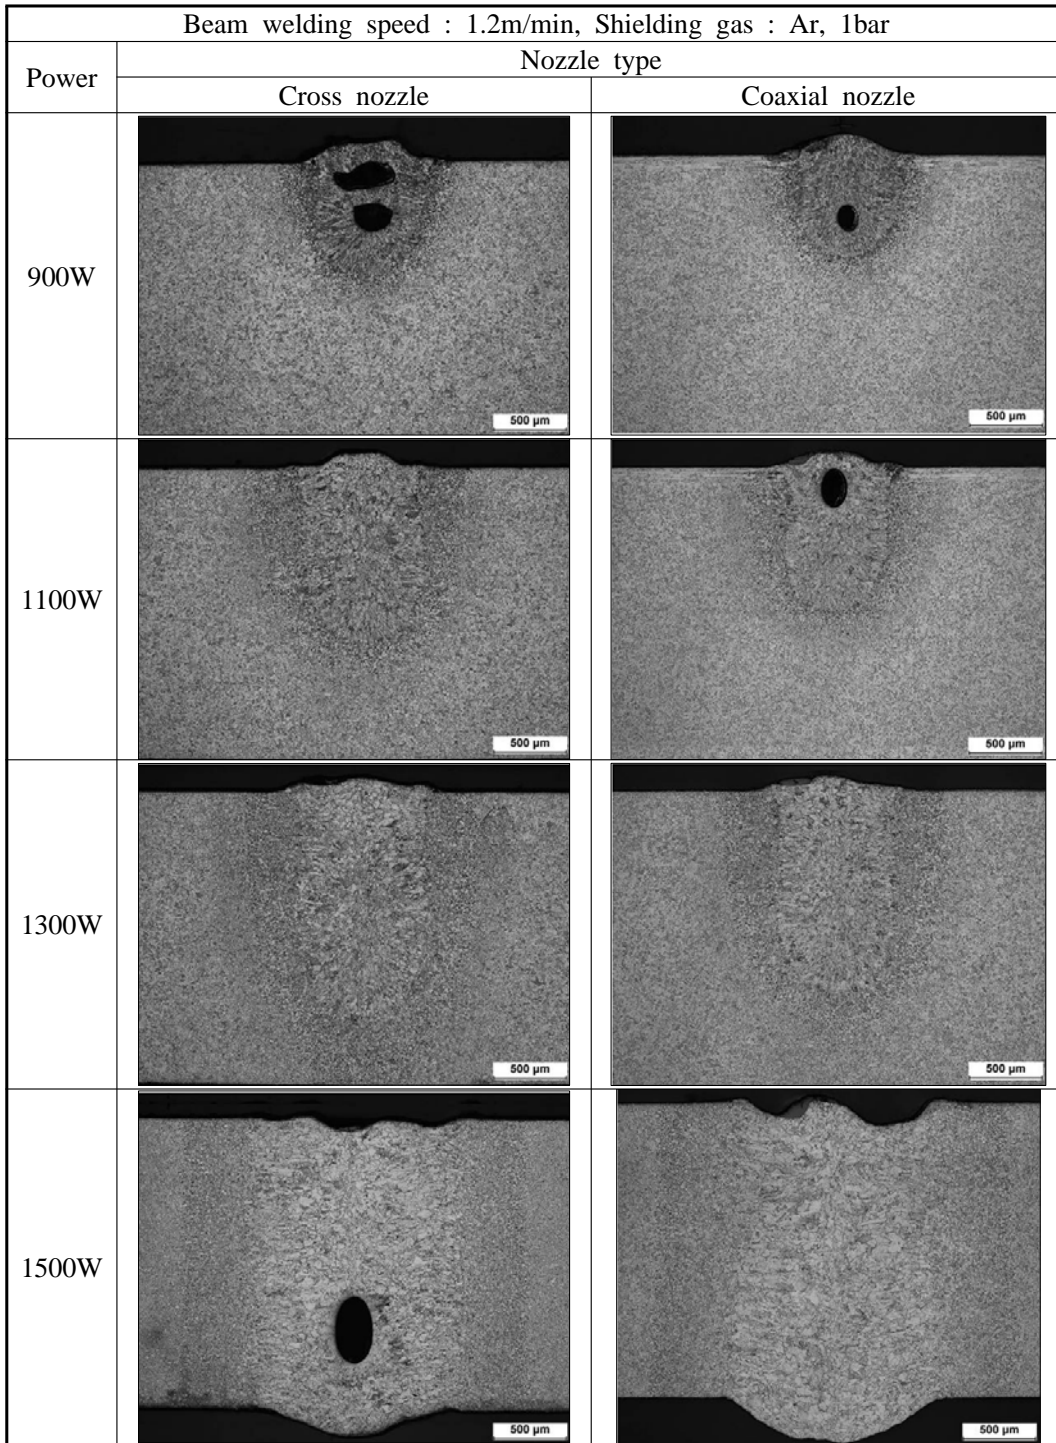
Cross-section of welding zone after nozzle type and laser power
